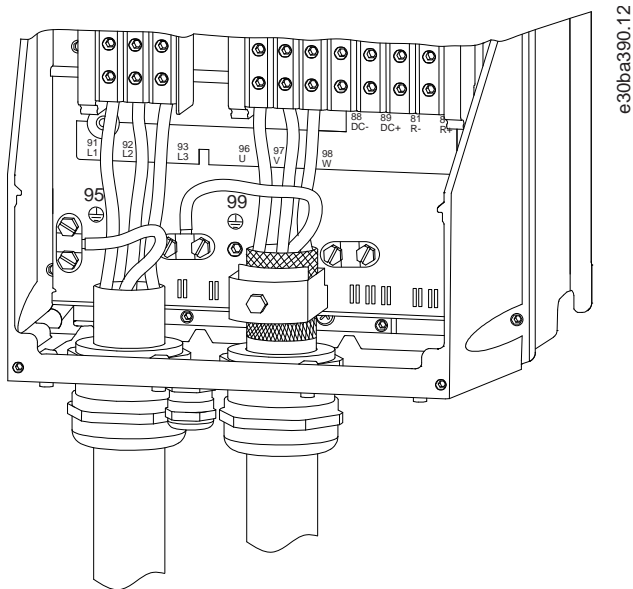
Motor, Mains, and Ground Wiring for Enclosure Types B and C Using Shielded Cable
